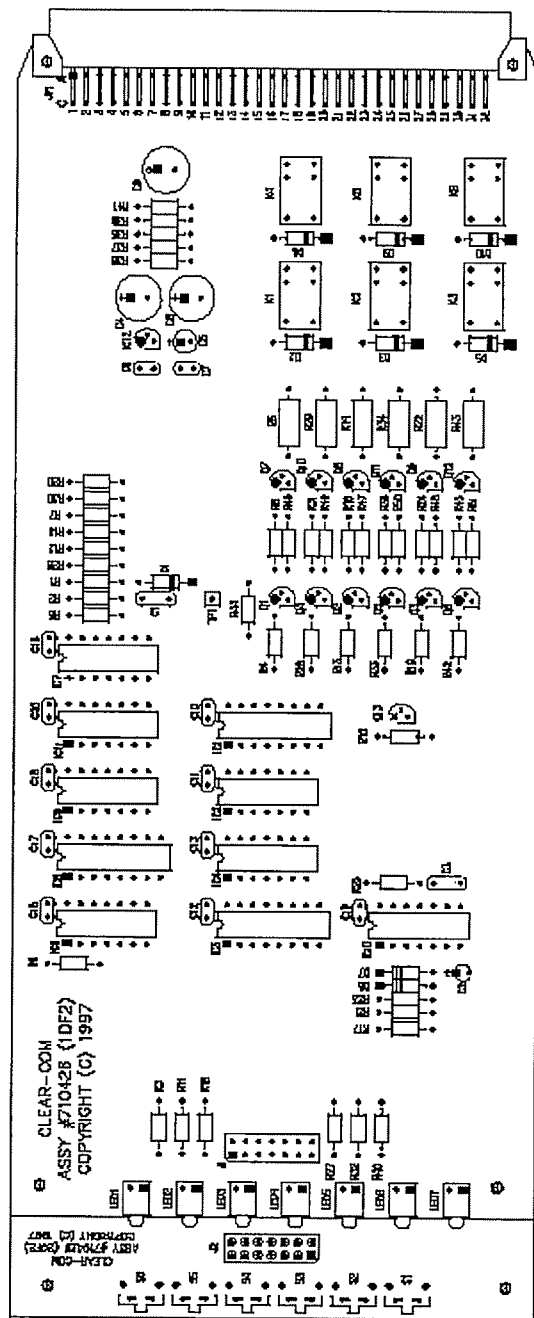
Assembly Drawing - RLY-6 PCB, Rev. B
